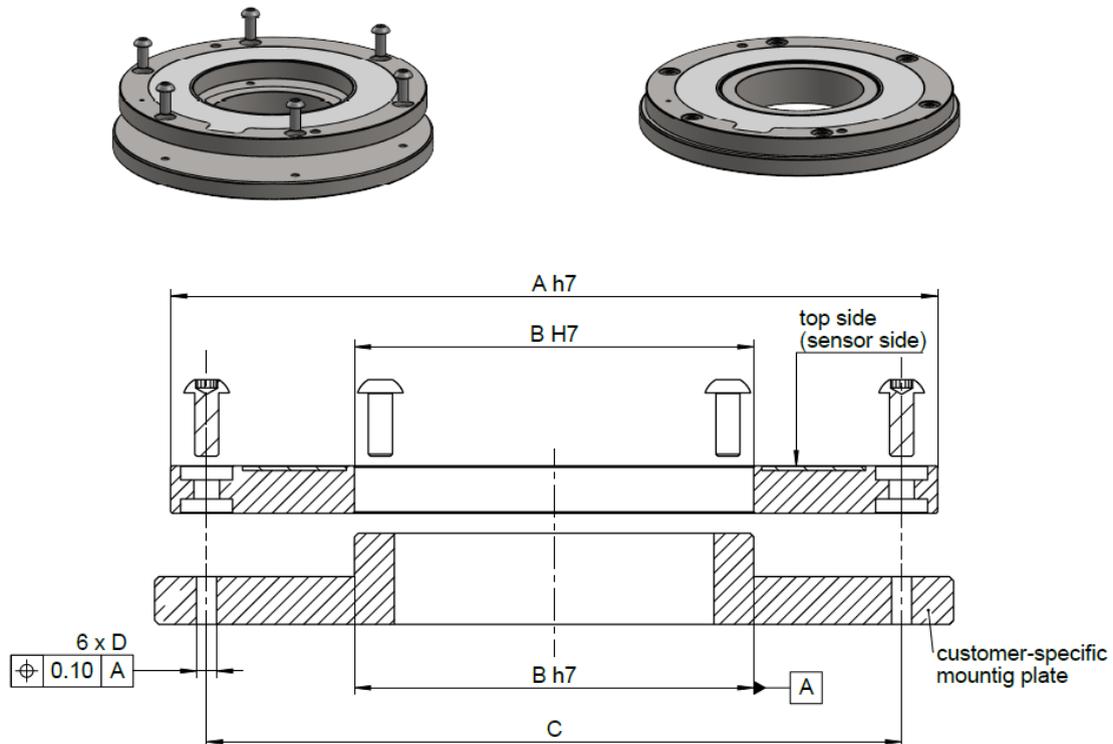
Stator (GAS) mounting using ID sliding fit
